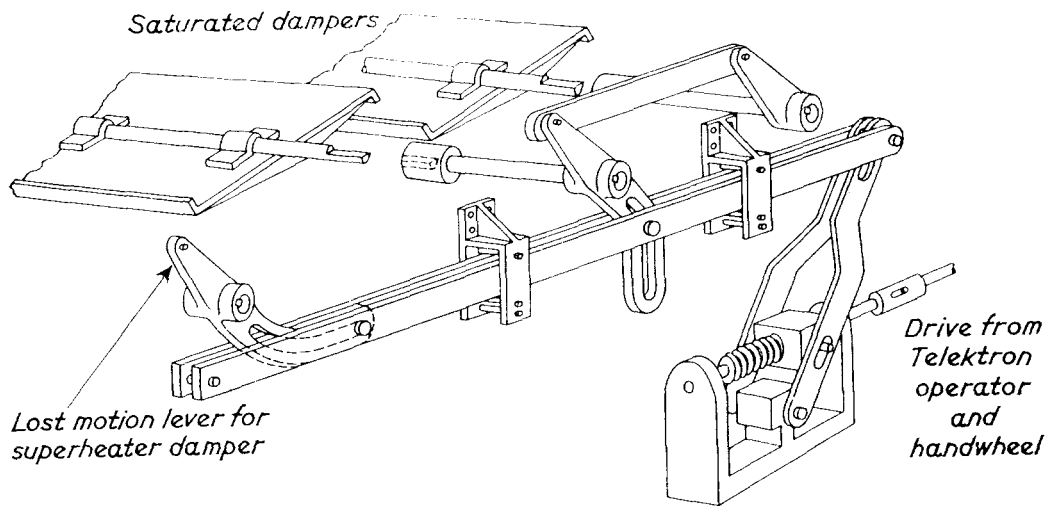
ORIGINAL SUPERHEATER DAMPER OPERATING GEAR
